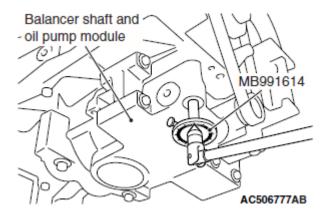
Identifying Balancer Shaft And Oil Pump Module Mounting Bolts Tightening Sequence
